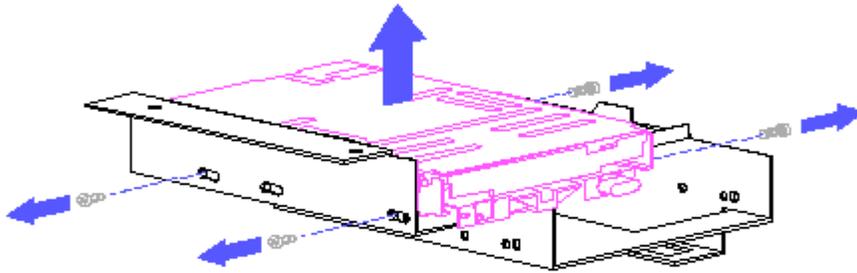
Removing the 3.5-Inch Diskette Drive
